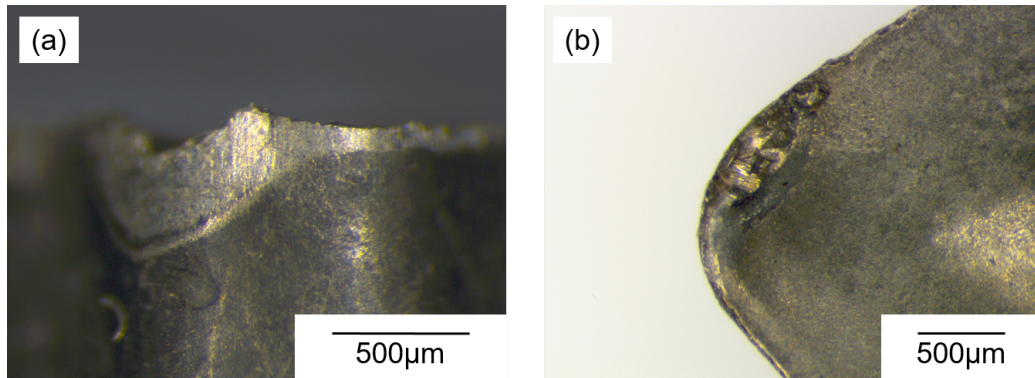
Microscope images showing the degree of tool wear after trial 3.2.3 on billet 3.2. Showing (a) the flank face and (b) the rake face.
